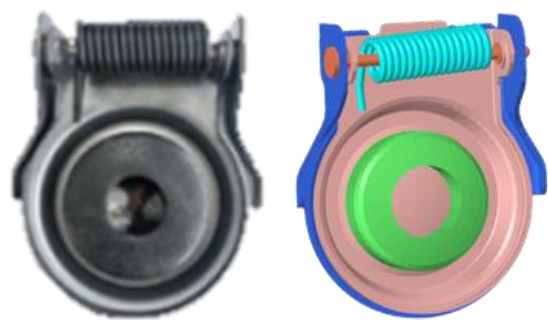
Actual Exhaust Valve & Shape of FEA Model
